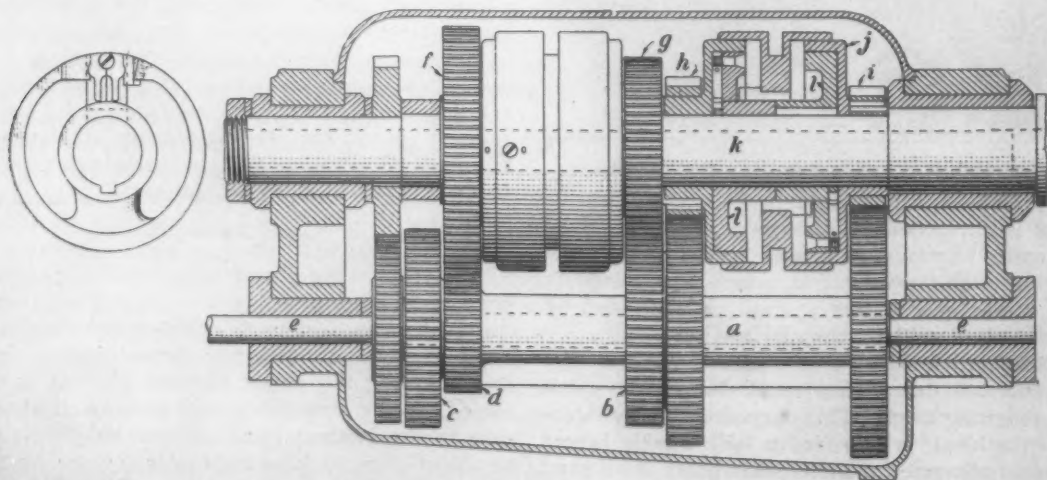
Vertical Section Through Headstock, Showing Speed Change Gears.
